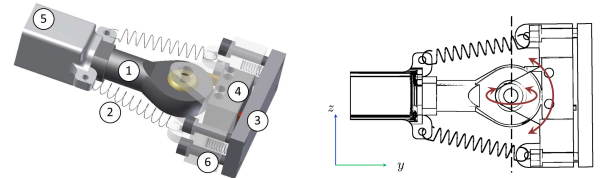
Left: CAD picture of tool tip: 1. Gimbal bearing, 2. Springs to stabilize gimbal, 3. End effector plate, 4. Micro switch, 5. Connection to quadrotor, 6. Springs to bring back the plate in rest position when not in contact; Right: Schematic side view of tool tip presenting the degrees of freedom of the tool tip.
